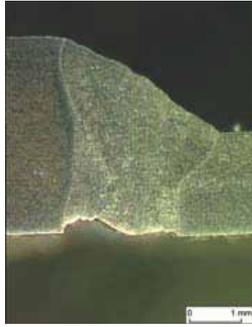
Aluminum butt joint (AA6181 2 + 4 mm); P = 6.9 kW, v = 4m/min, v_D = 4 m/min, gas Argon
